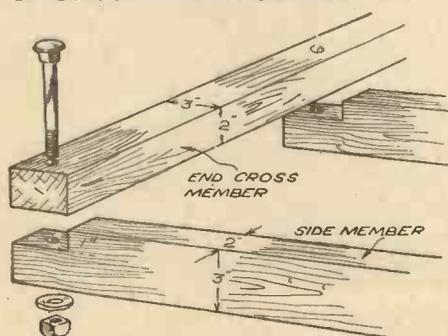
Method of jointing used between the ends of the chassis side members and cross members.
